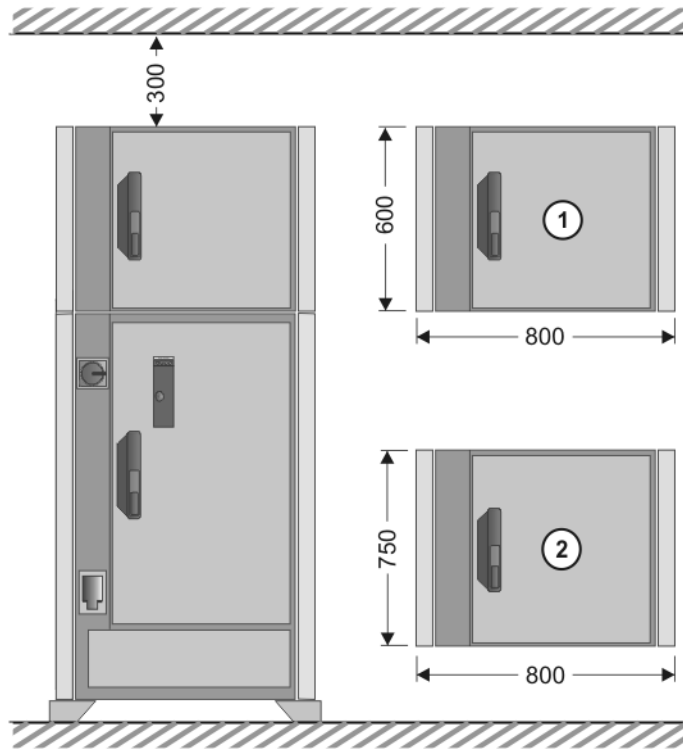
Minimum clearances with top-mounted / technology cabinet
